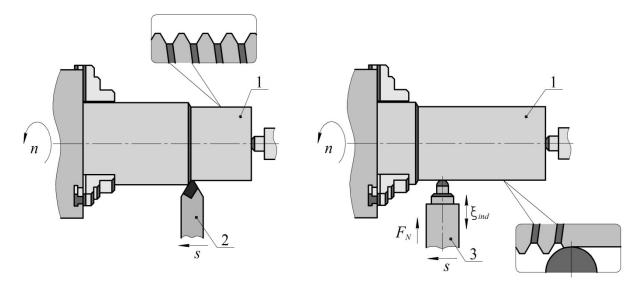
The diagram of finishing with ultrasonic tool: 1 – workpiece; 2 – cutter; 3 – ultrasonic tool
